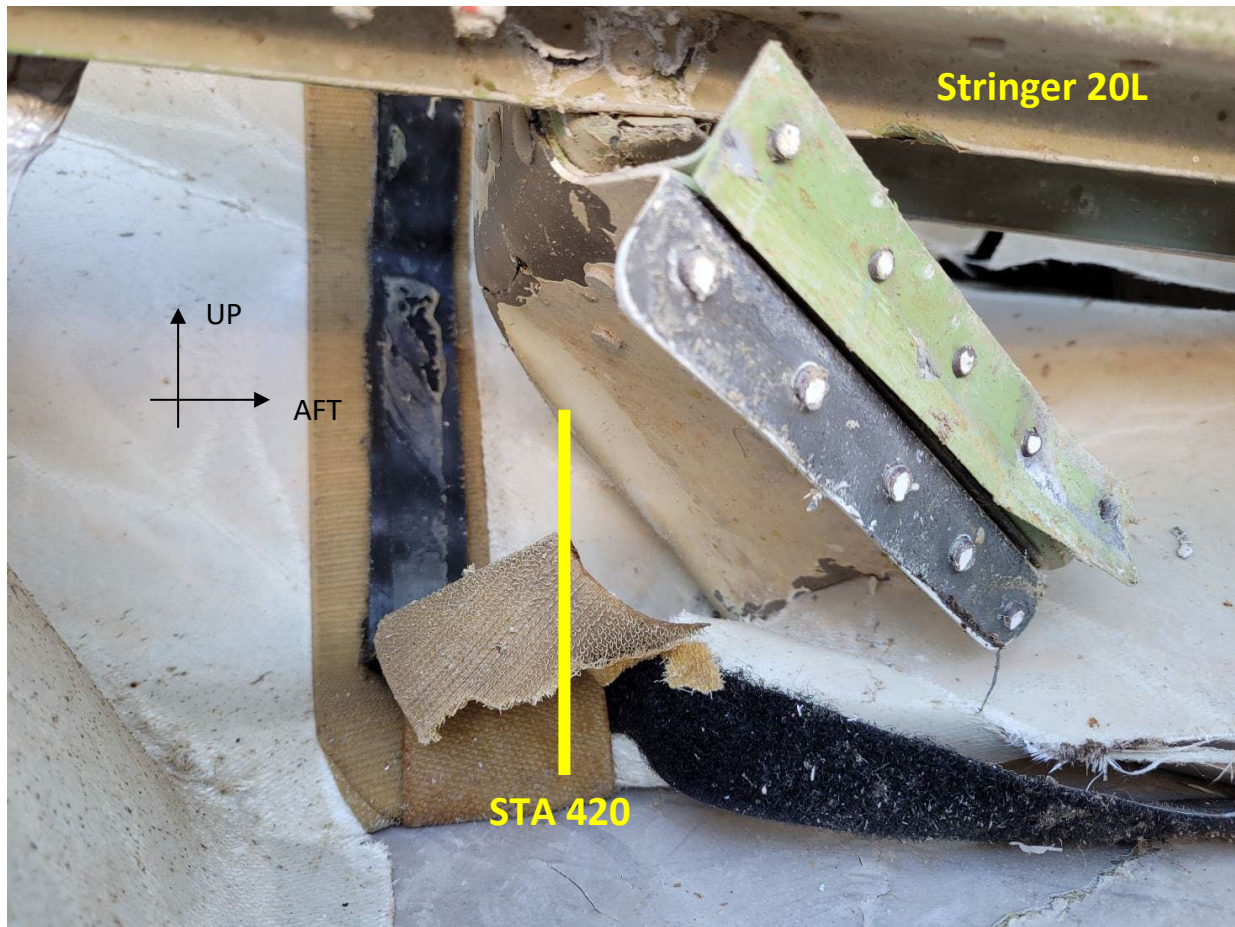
Left fuselage STA 420 frame damage detail (Boeing photo)
